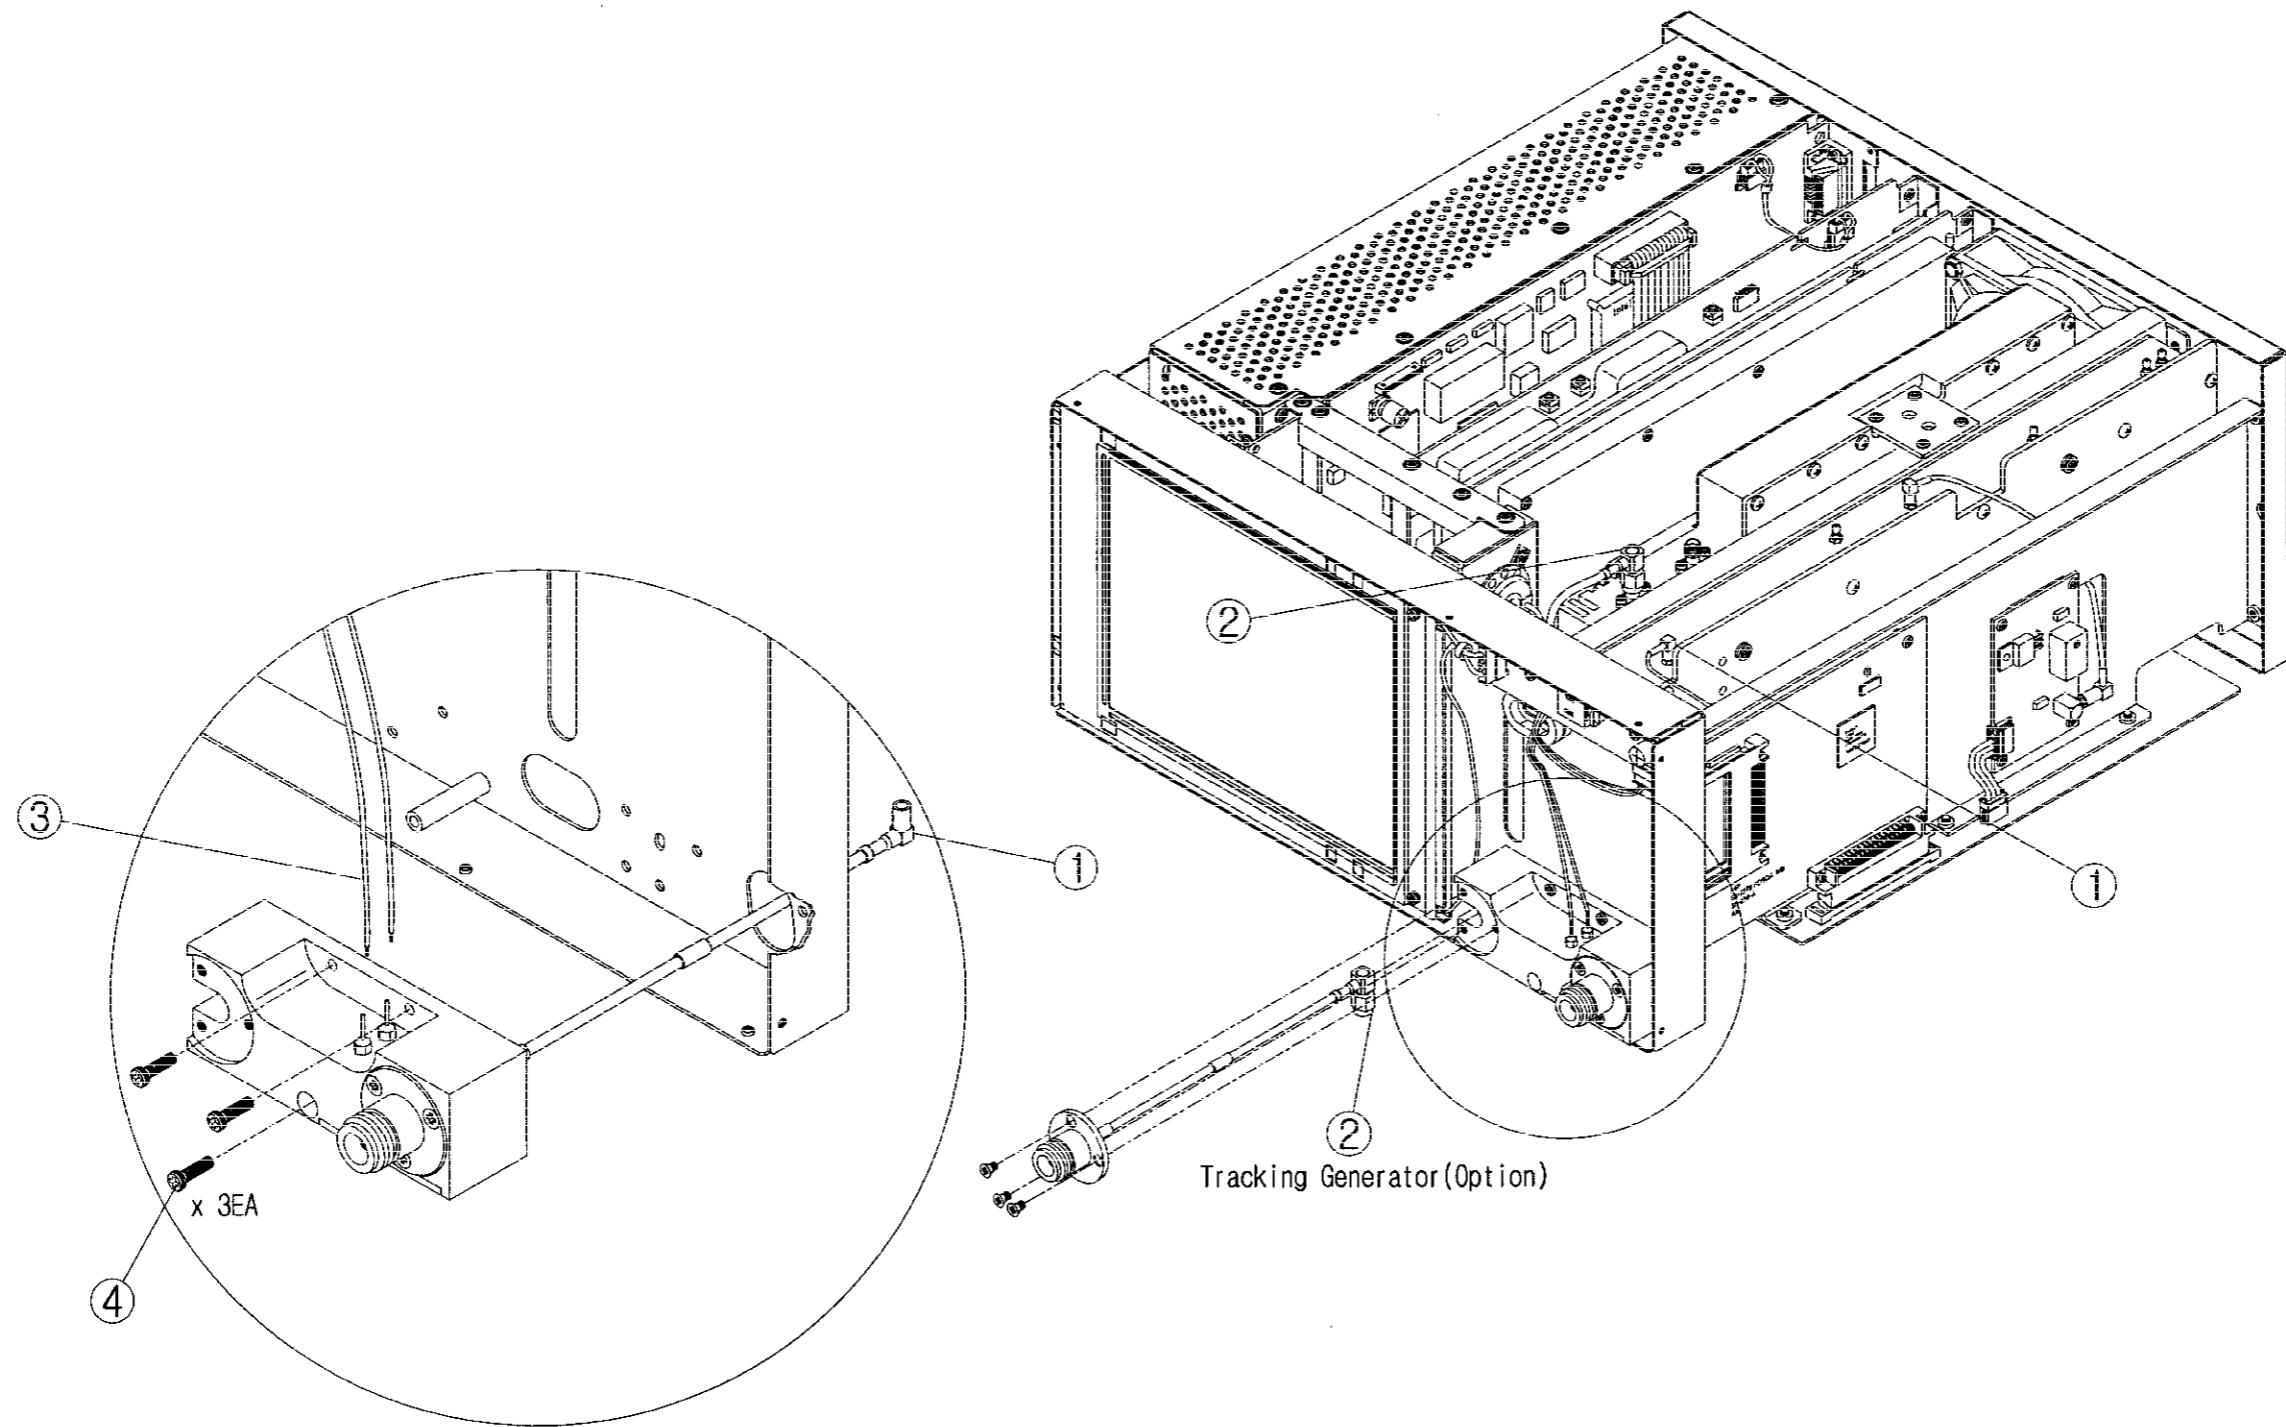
RF INPUT BLOCK ASSEMBLY
